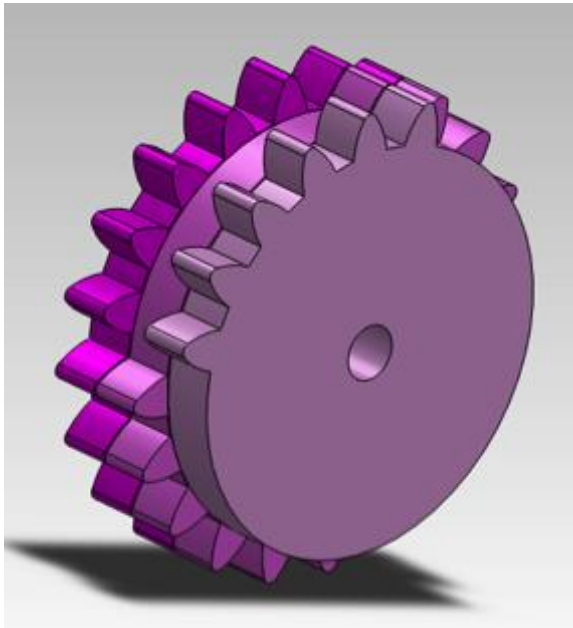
Mechanism Exploration with CAD, starting to move into 3D models
